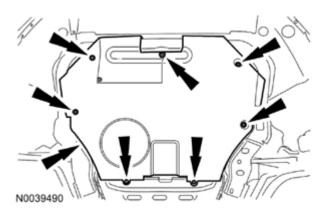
Locating Underbody Cover And Screws Courtesy of FORD MOTOR CO.
